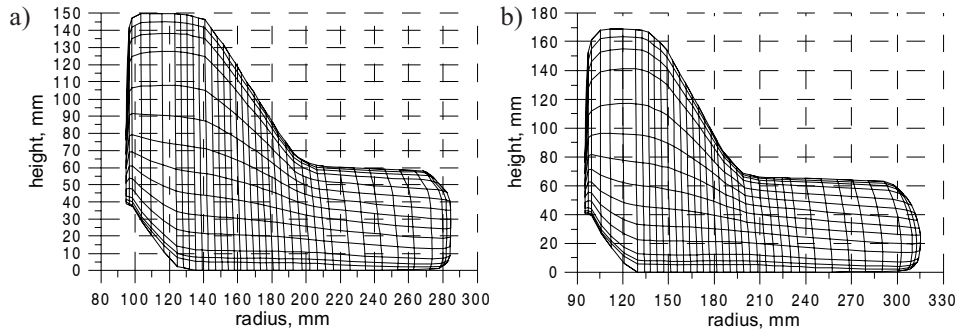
Preform designed for rolling of welding neck ring: a) welding neck 20"; b) welding neck 24"
